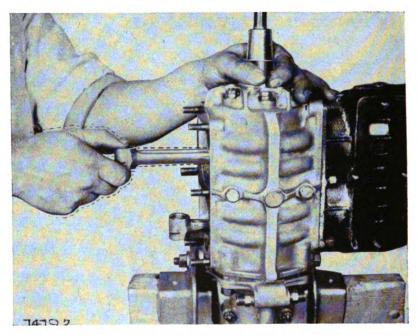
Up-and-down movement of rod should be about 1/32 inch.
